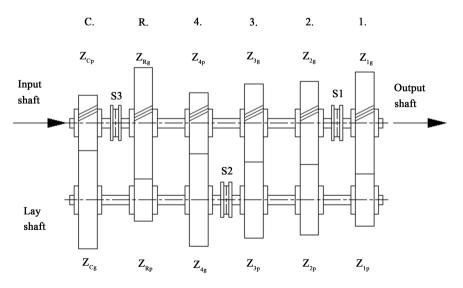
Five-Speed manual gearbox with helical gear for automotive transmission.
